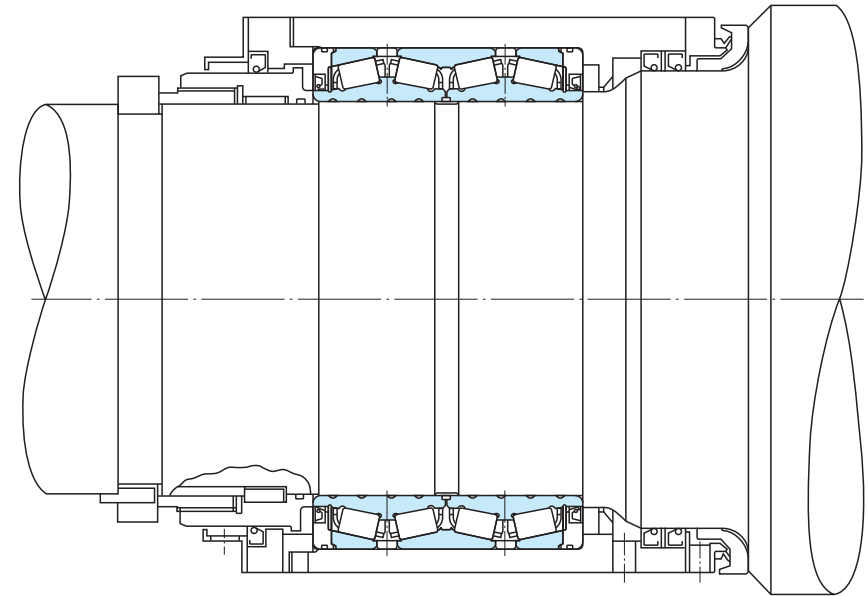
Work Roll Chock Assembly, Cold Strip Rolling Mill
